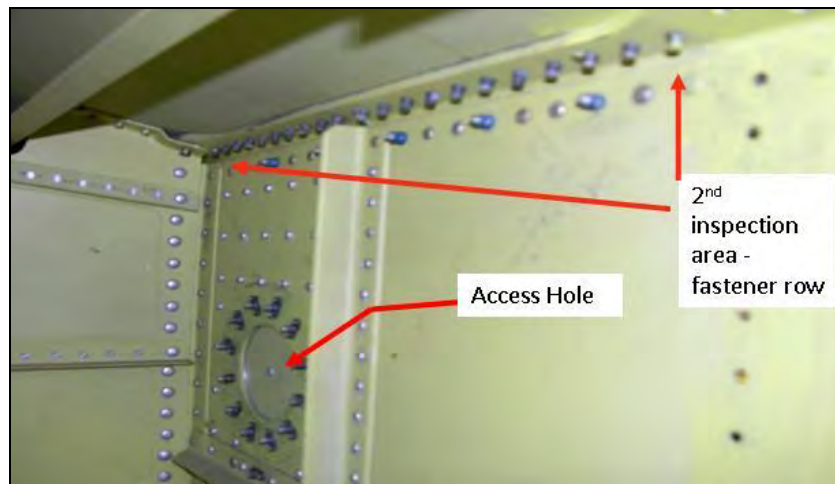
Alternate selected A-10 wing inspection area in the same cavity, but above the forward spar access hole.
